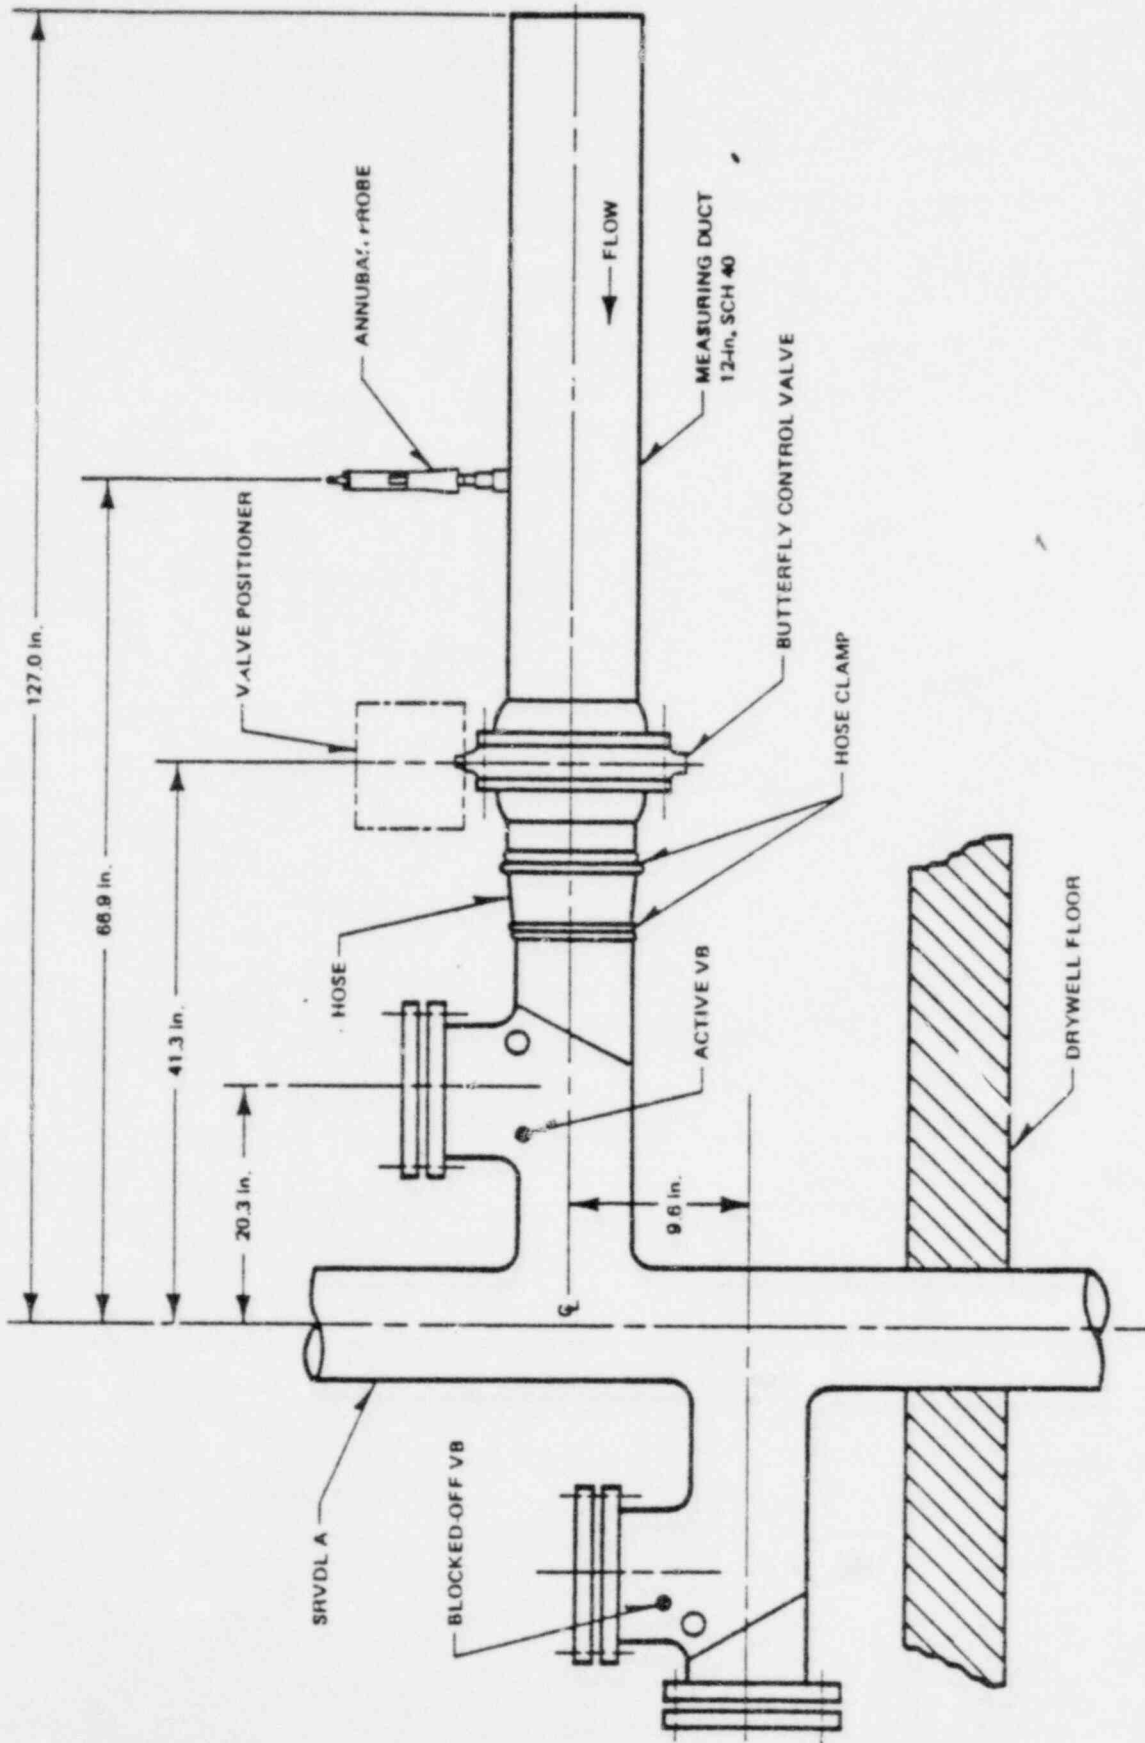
SRVDL A Vacuum Breaker and VB Measurement Assembly
